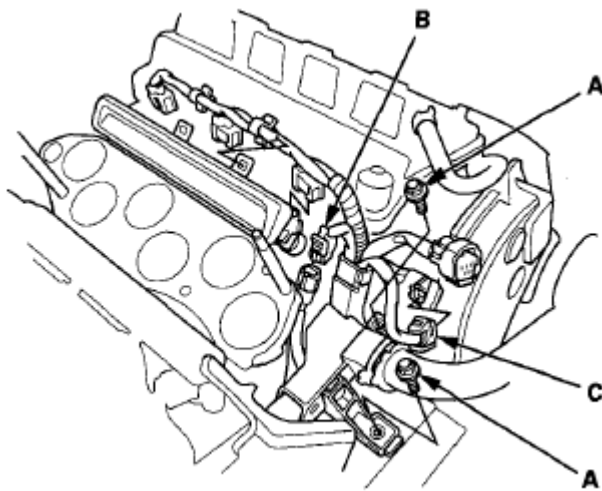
Identifying Mounting Bolts, Knock Sensor Connector And CMP Sensor Connector
